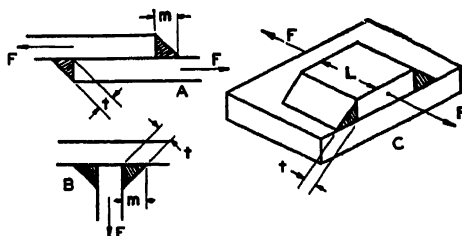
Fillet-welded Joints Subjected to Tension.
